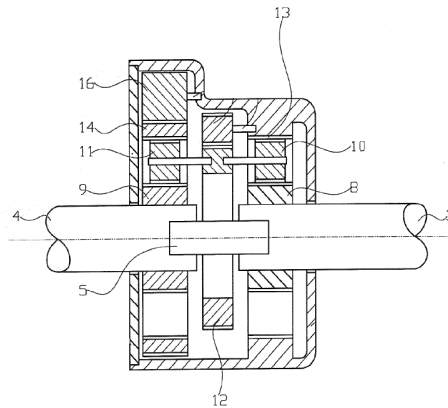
Drawing of mechanical phase shift torque sensor with input and output shaft (3, 4), torsion bar (5), sun gear (8, 9), planets (10, 11), common planet carrier (12) stationary ring gear (13), rotating ring gear (14) and rotation sensor (16). [10]
